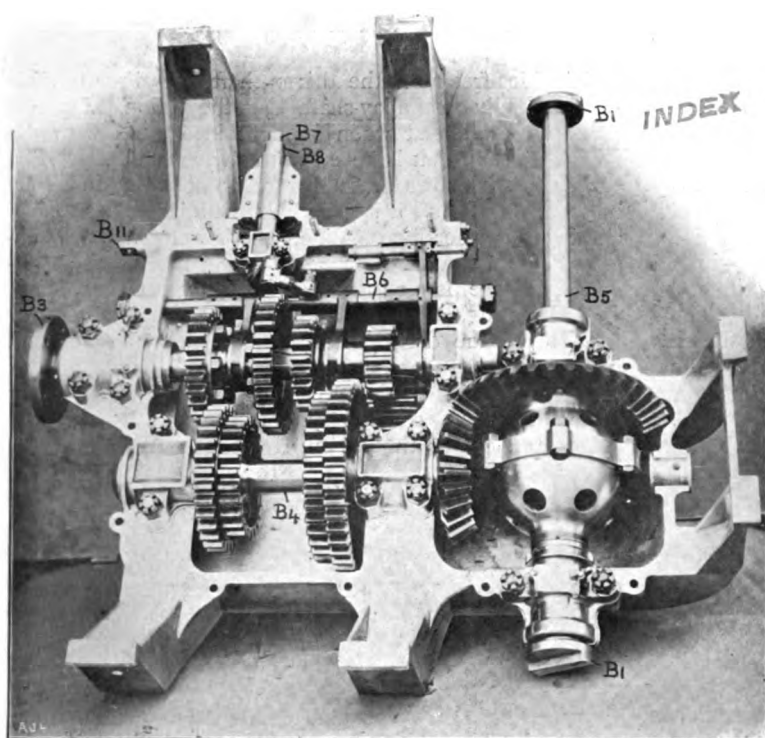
The Gear-box, with the Upper Portion removed to show the Interior Mechanism.
